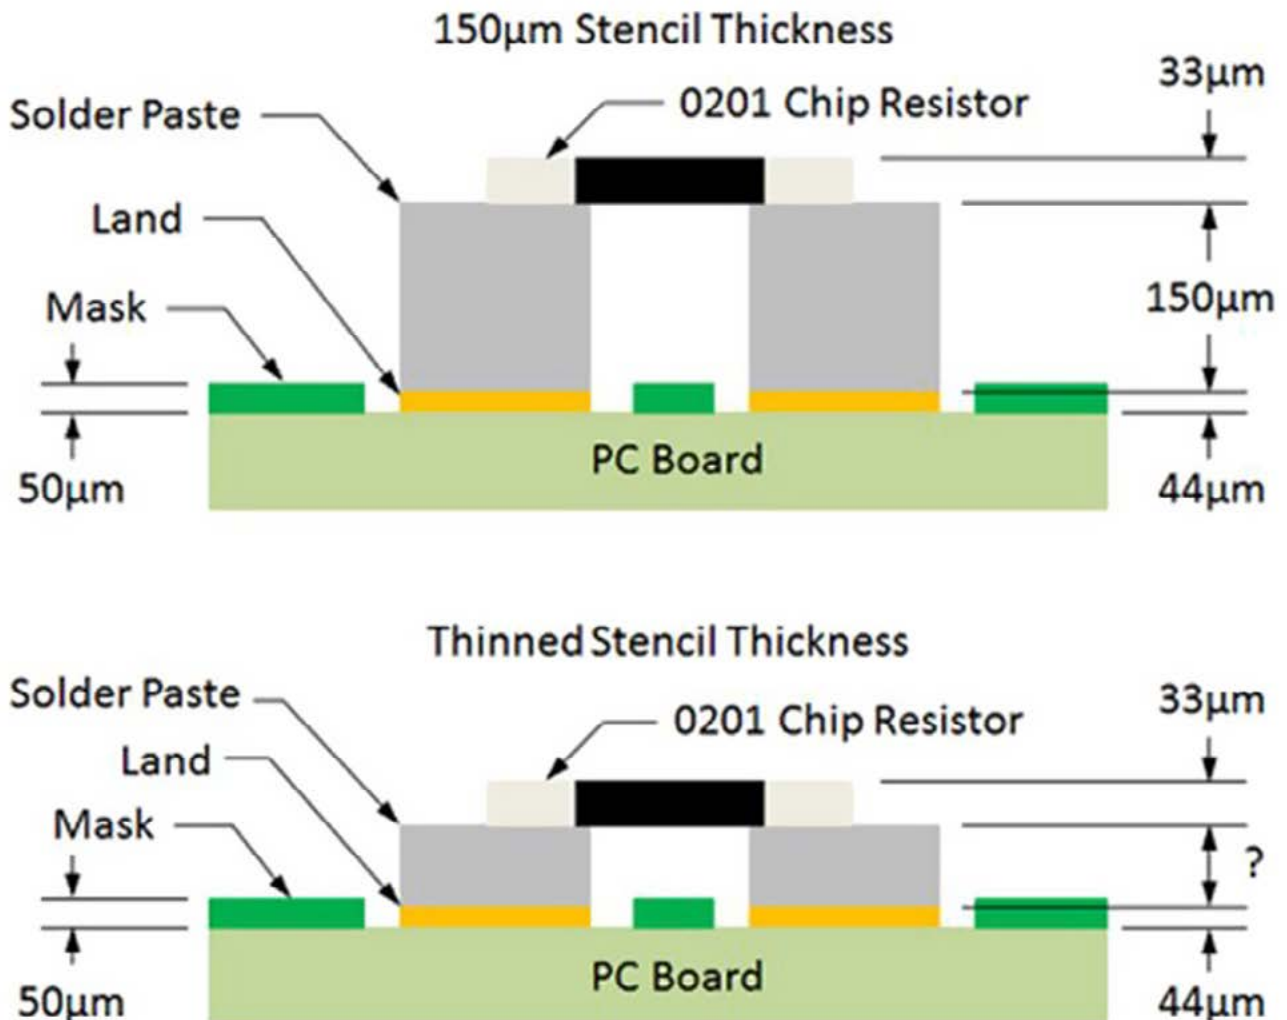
Graphic showing too much solder being used for 0201 chip resistor.
